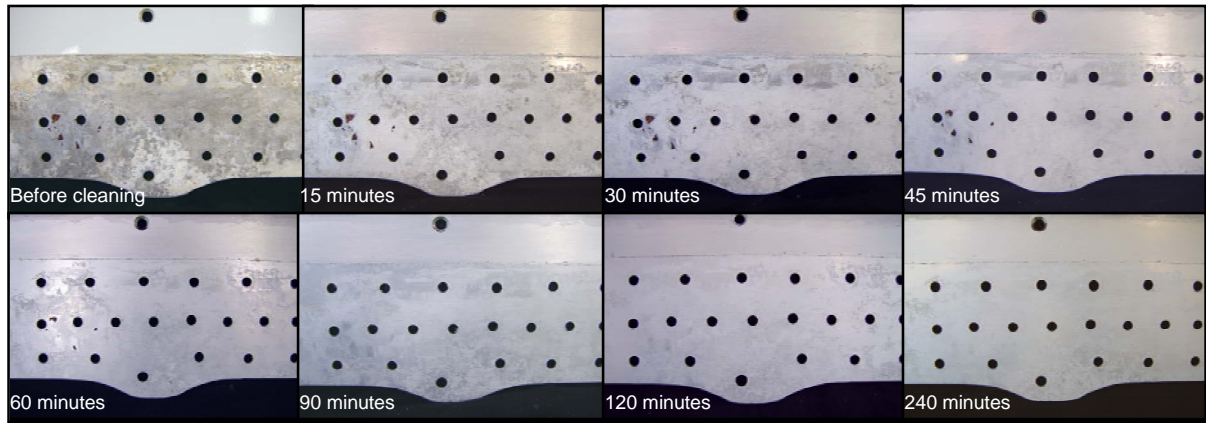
Views of Skin Surface Before and During Long Exposure Chemical/Ultrasonic Corrosion Cleaning for Corrosion Removal.
